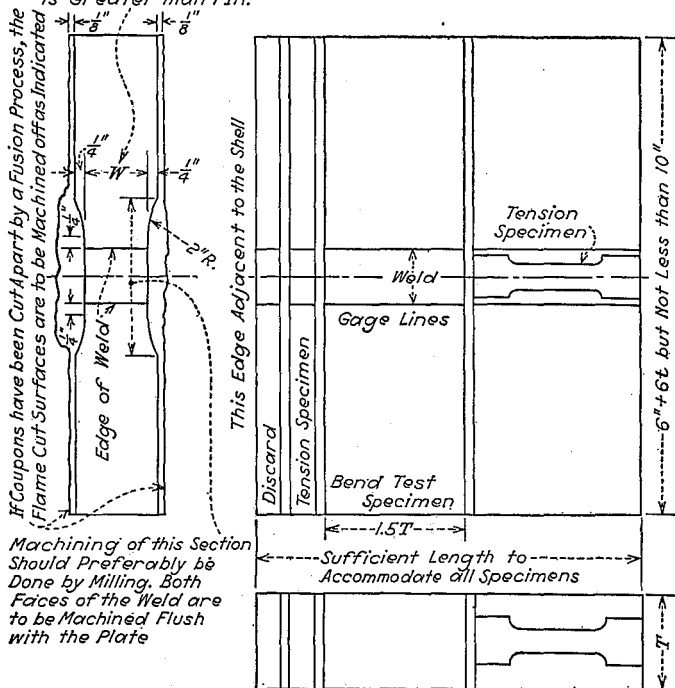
TEST SPECIMEN FROM LONGITUDINAL WELDED TEST PLATES
